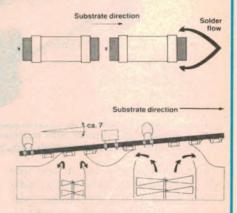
SMD components close together tend to stop the flow of solder to individual connections. Tilting the board helps vent any gases produced during soldering. (Diagram by courtesy of Philips.)
